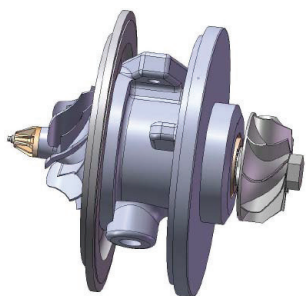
Picture of a turbocharger cartridge. The left wheel concerns the impeller and the right one is the turbine.
